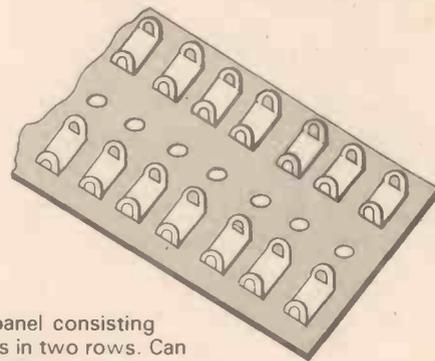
Tag panel consisting of double tags in two rows. Can be a useful alternative to circuit boards for simple assemblies.
